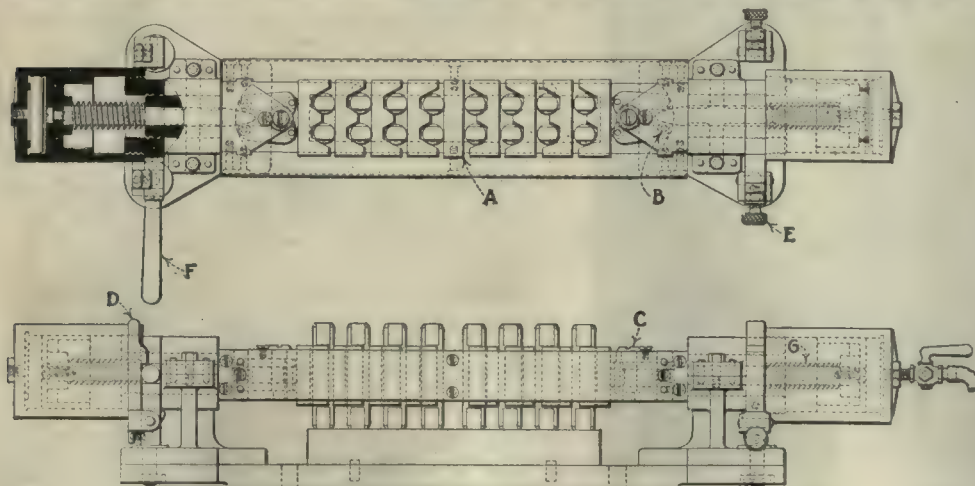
PNEUMATIC MILLING FIXTURE ASSEMBLY
